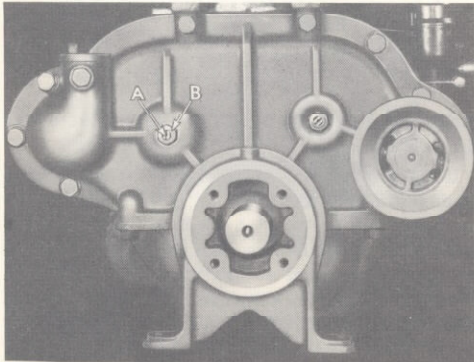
Illustration No. 12—Adjustment of Cam and Idler Gear Shafts J-30 Model
